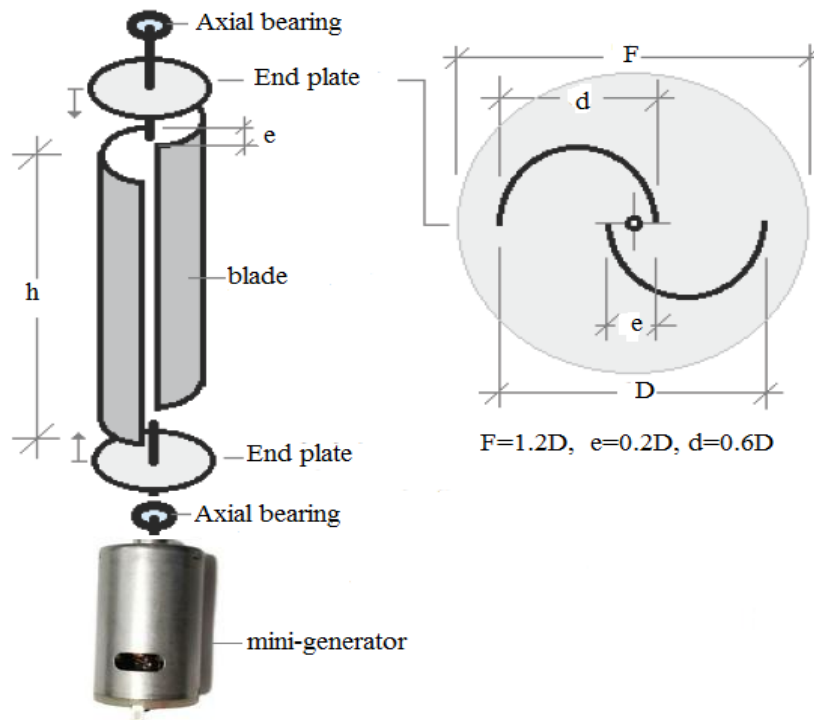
Sketch of the Savonius wind turbine and its geometric dimensions
